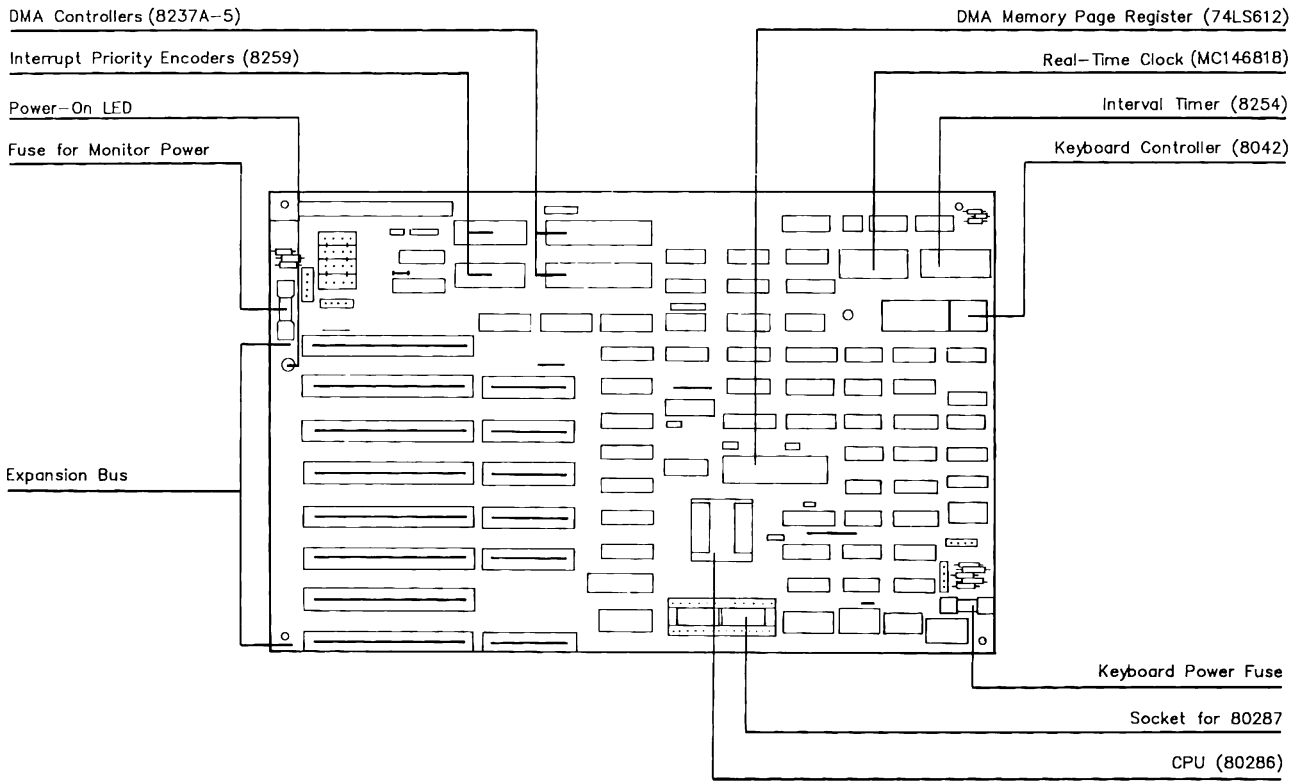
COMPAQ DESKPRO 286 Version 1 System Board Component Layout (Page 1 of 1)
